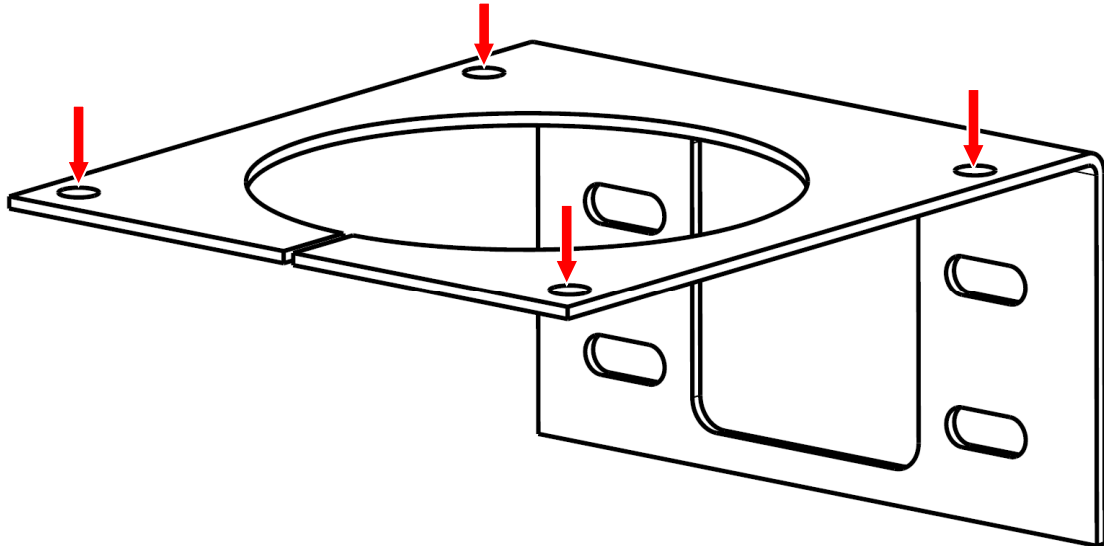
CT mounting plate with fixing points (L-profile PLB029-377330)
